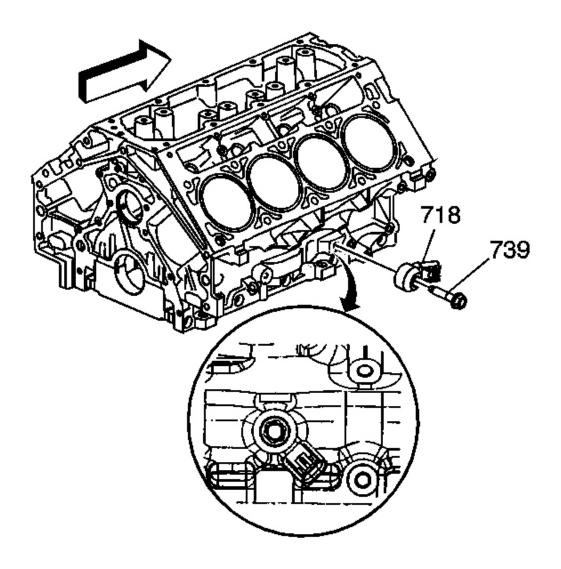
Right Side Knock Sensor & Bolt Courtesy of GENERAL MOTORS CORP.
